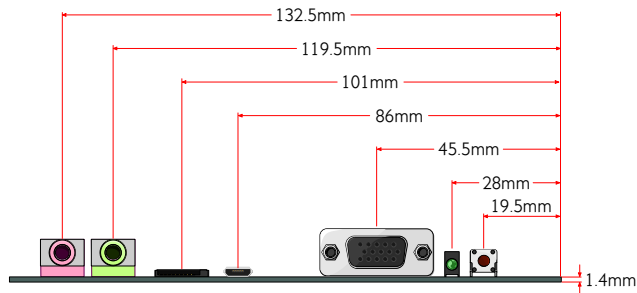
External I/O port dimensions of the VAB-630 (front panel)
